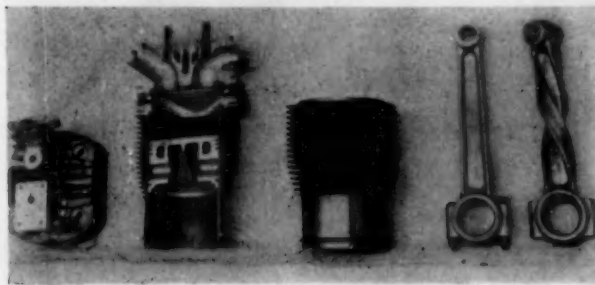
Y-Alloy Cylinder Head; C. I. Cylinder; and Duralumin Connecting Rods. Also, Split Half of Cylinder, Piston and Head.
